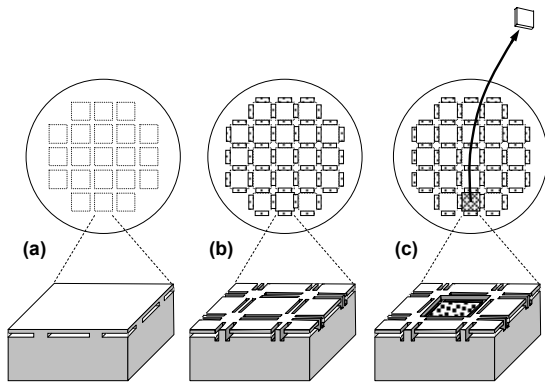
Schematic illustration of the new Pick, Crack & Place™ process with (a) the pre-process buried cavity and strong chip attachment, (b) after trench etching to reach a weak chip attachment, and (c) after chip detachment.
